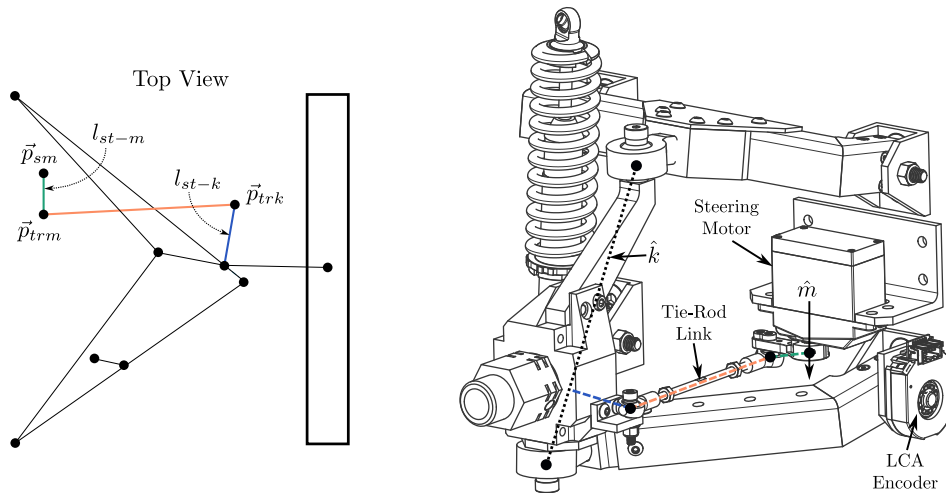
Left: Steering system design hardpoints. Right: Implement steering system CAD design, outlining the tie-rod link, steering motor, and kingpin axis (\hat{k}).
